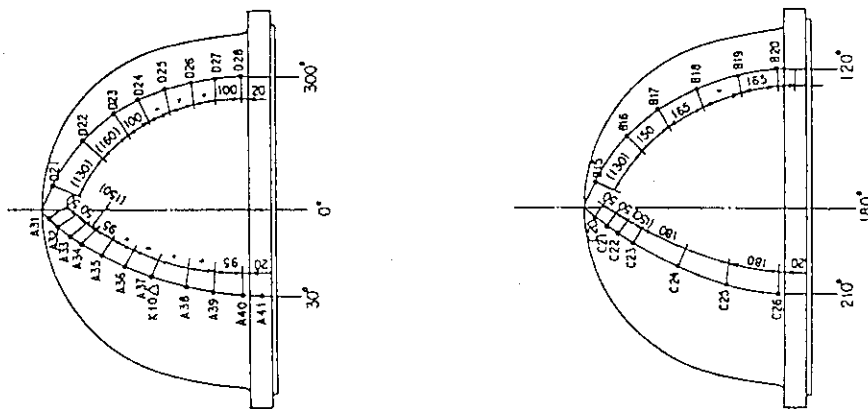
Thermocouple positions on the outer surface of the pressure vessel -upper head
